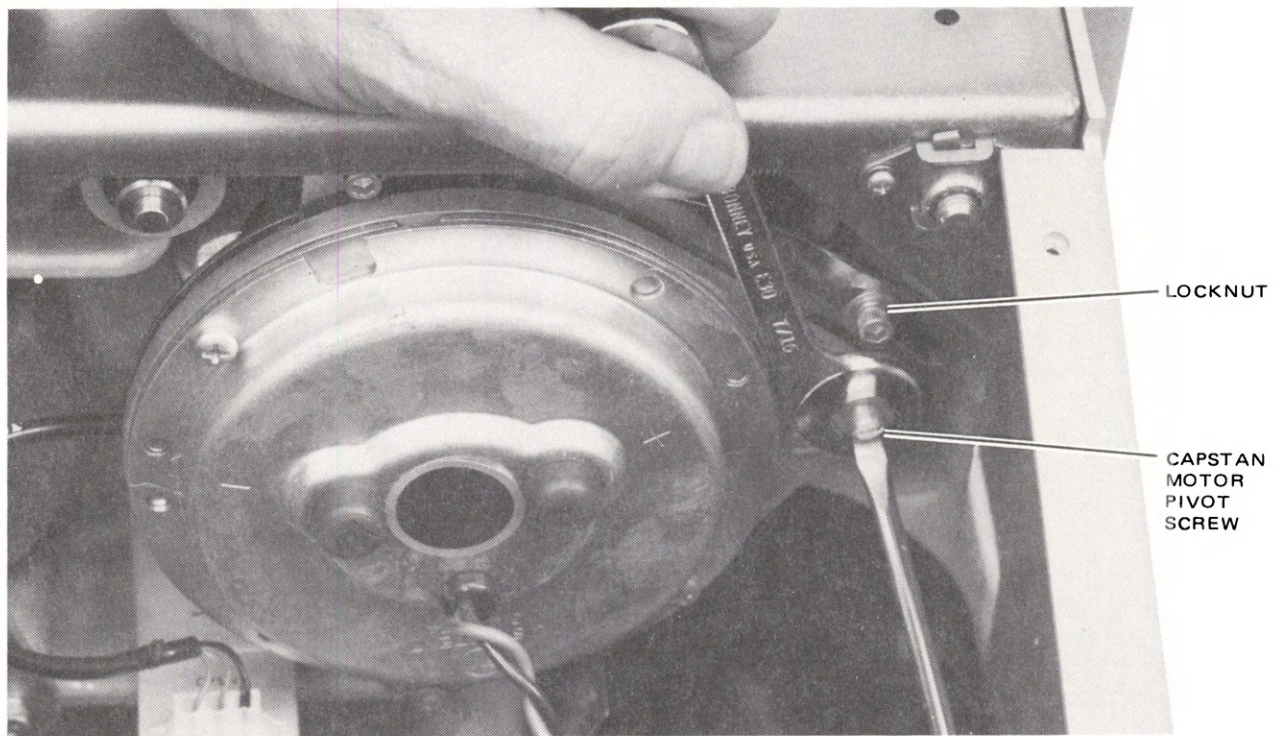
Adjusting Capstan Motor Pivot Screw
